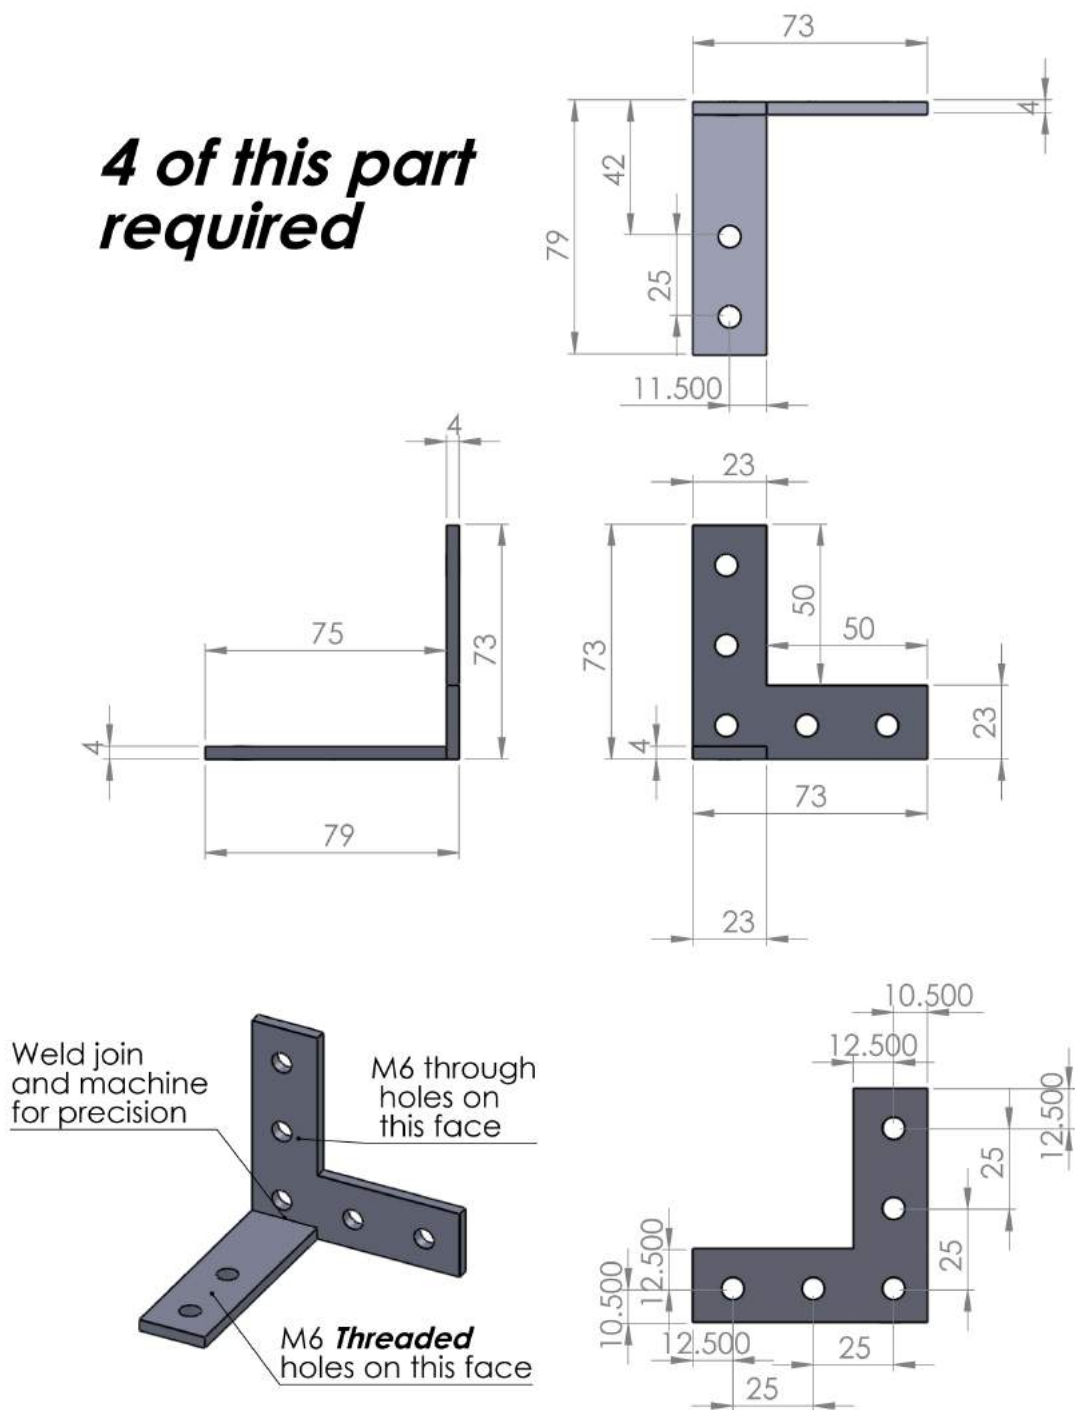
The bottom corner pieces which secure the corner posts to the bottom frames of the cage. The through holes bolt through the bottom frames onto the experimental table. The threaded holes allow the corner posts to be secured in place.
